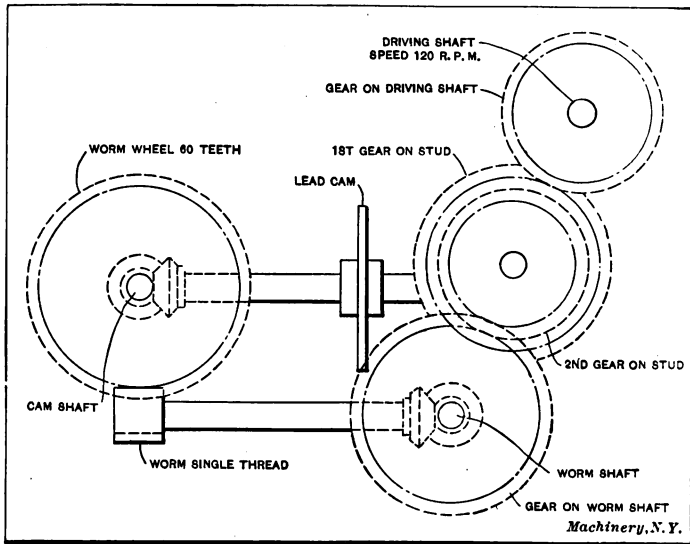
Diagram of Gearing on the No. 2 Brown & Sharpe Automatic Screw Machine
